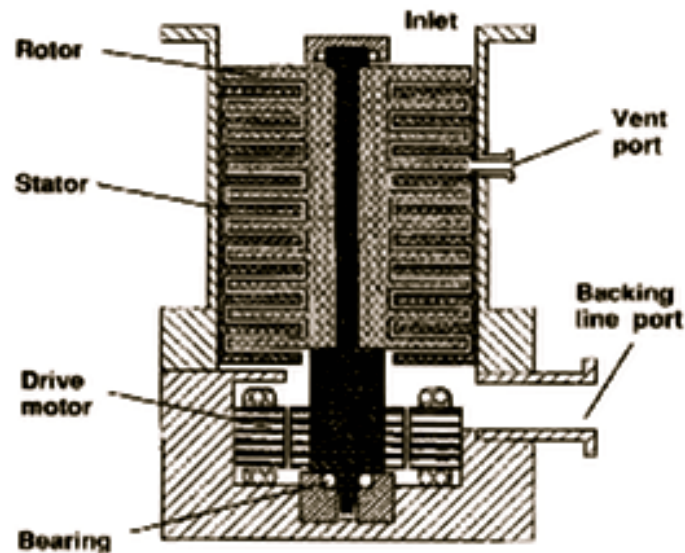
Schematic of a turbo-molecular pump. The turbo pump is much like a turbine engine, but the other way around. Instead of expanding gas rotating turbine blades, here the rotating rotor, in combination with the stationary blades of the stator, force gas molecules entering in one direction. From reference [\[82\]](#)
